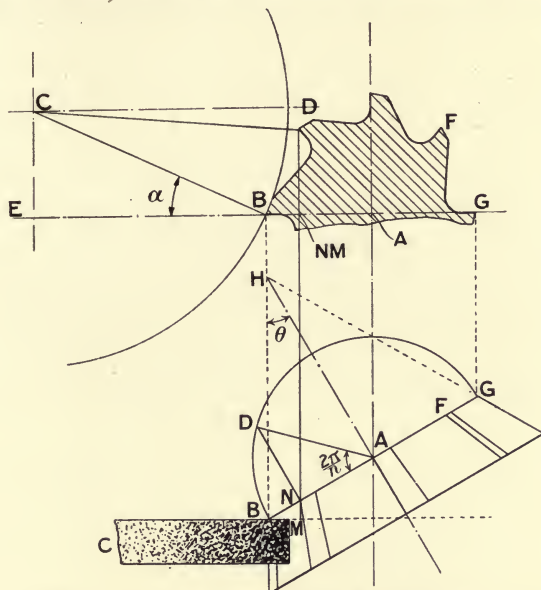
MAXIMUM SIZE OF DISC WHEEL—
